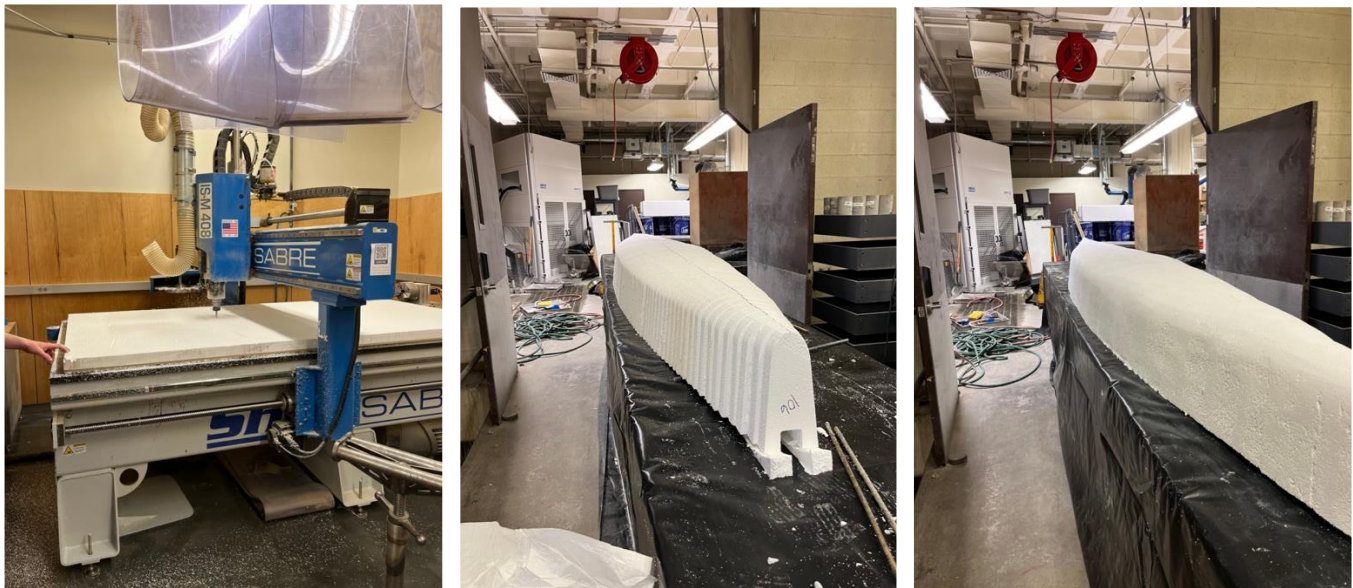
Foam Cutting on the CNC (left), Assembling the Mold (middle), Sanded Foam Mold (right)
